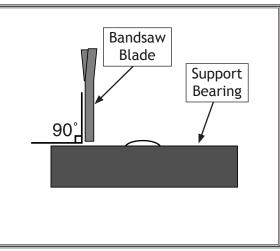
Illustration of blade set perpendicular (90°) to the support bearing face.
